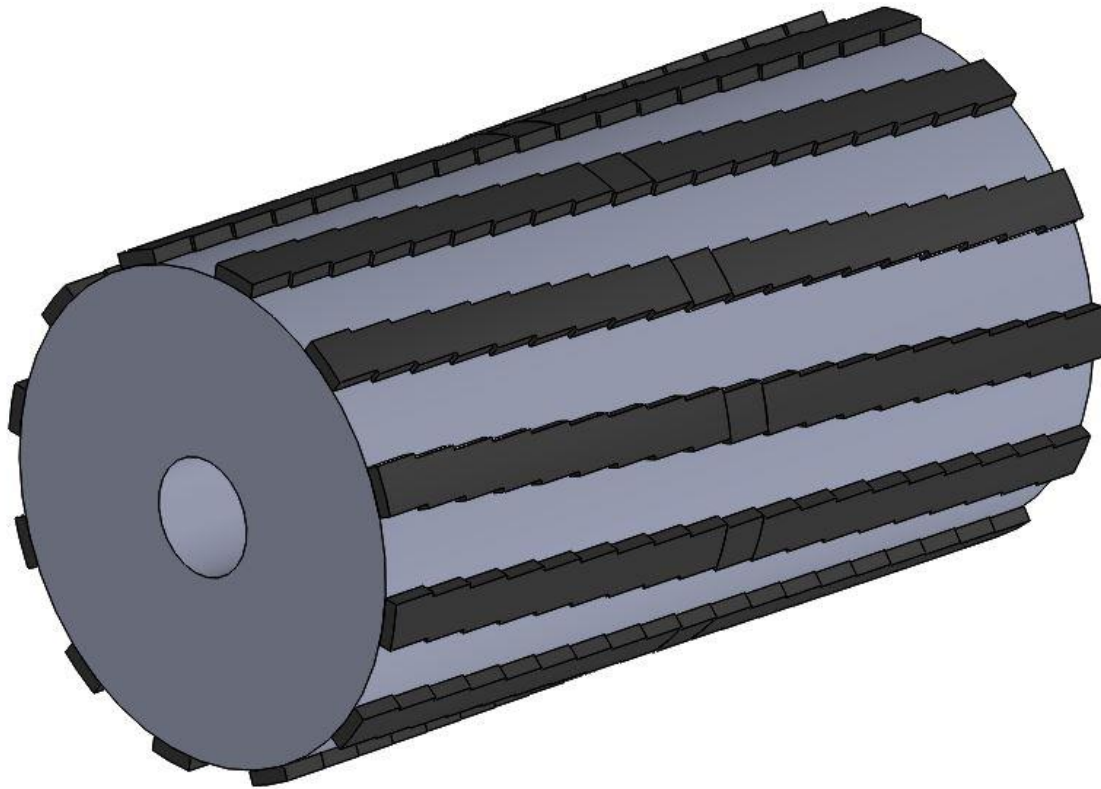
Skewed rotor principle applied to a rotor surface magnets design.
